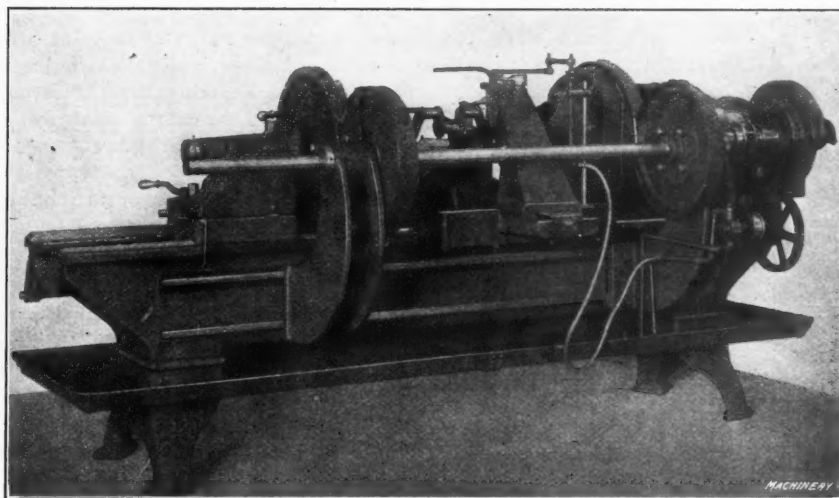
Opposite Side of Machine shown in Fig. 5, illustrating Geared Connection of Head and Tail Fixtures
